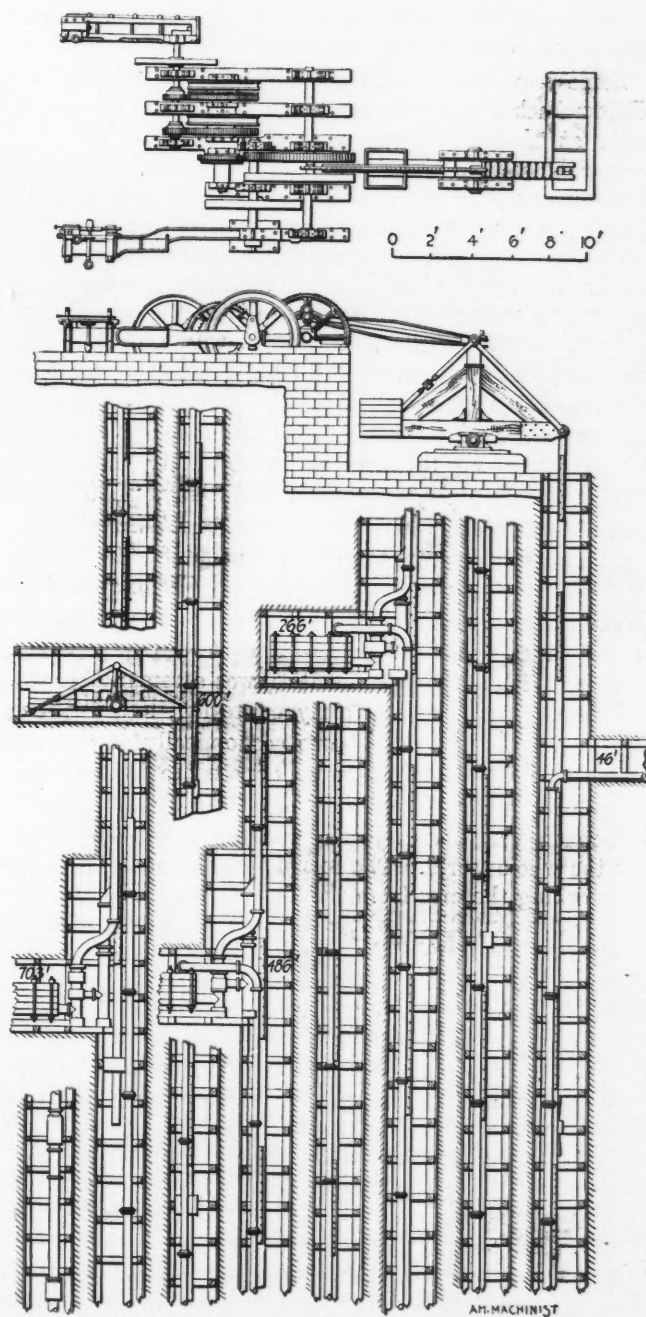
PLAN AND ELEVATION OF THE PUMPING AND HOISTING WORKS BUILT IN 1874
